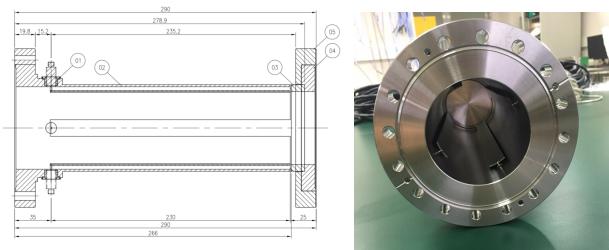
Mechanical drawing and a fabricated prototype BPM.
